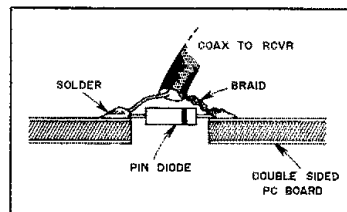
One method of attaching the PIN diodes to the double-sided pc board is shown here. Details are given in the text. The coaxial cable leads to the diode should be no longer than approximately 5 mm (0.2 in.).
